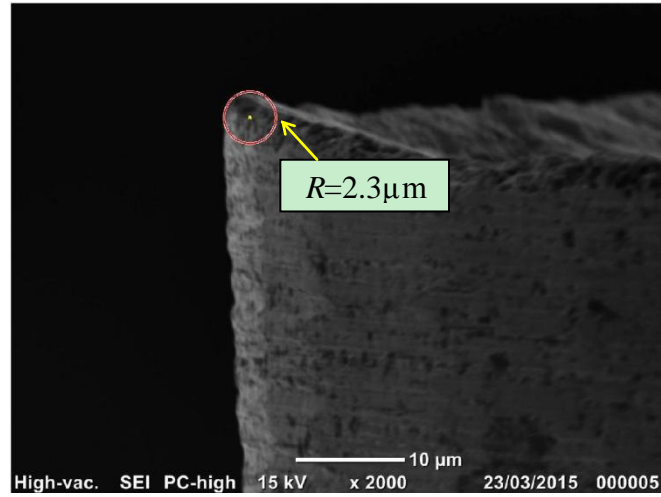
Cutting edge radius of a tungsten carbide tool
